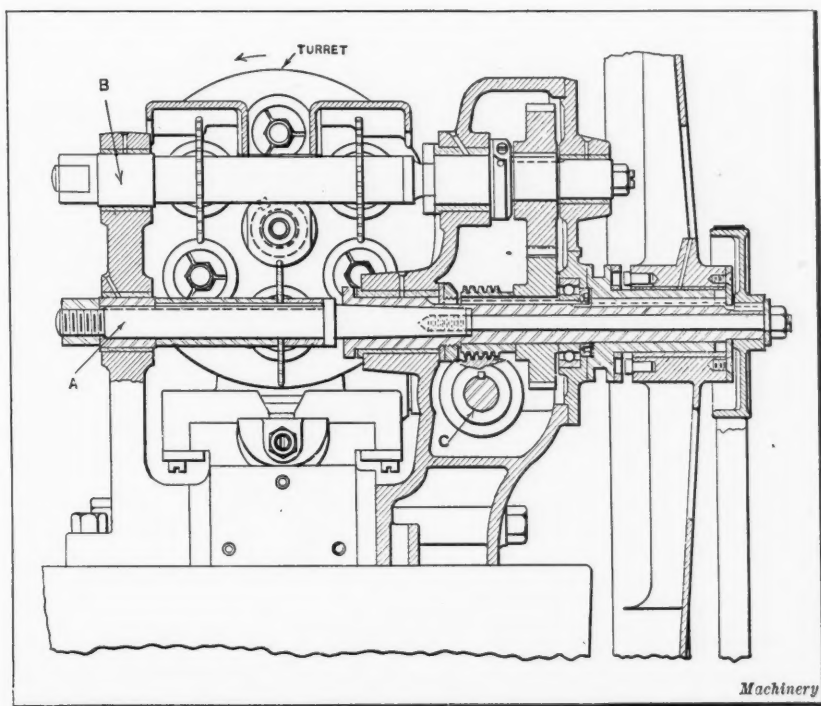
Cross-section showing Method of driving the Cutter-arbors and the Camshaft
